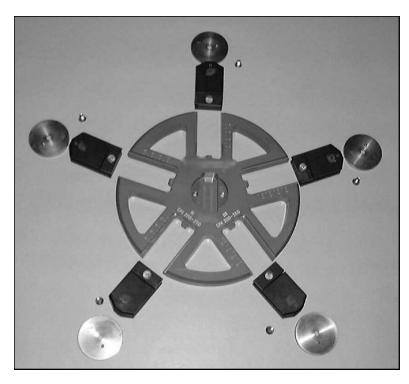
TOOL COMPONENTS FOR PLANET GRINDING WHEEL (AS SHOWN WITH PLANET WHEEL DIA. 220 MM, PLANET ARMS SIZE II, CBN-GRINDING DISCS DIA. 50 MM)
